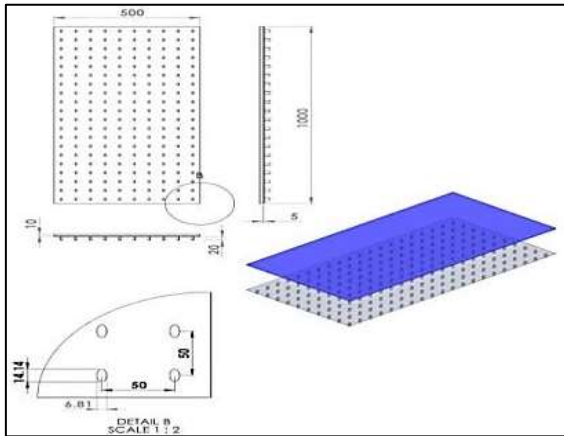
Basic dimensions in (mm) of the panel model with elliptic pin fin cooling module
